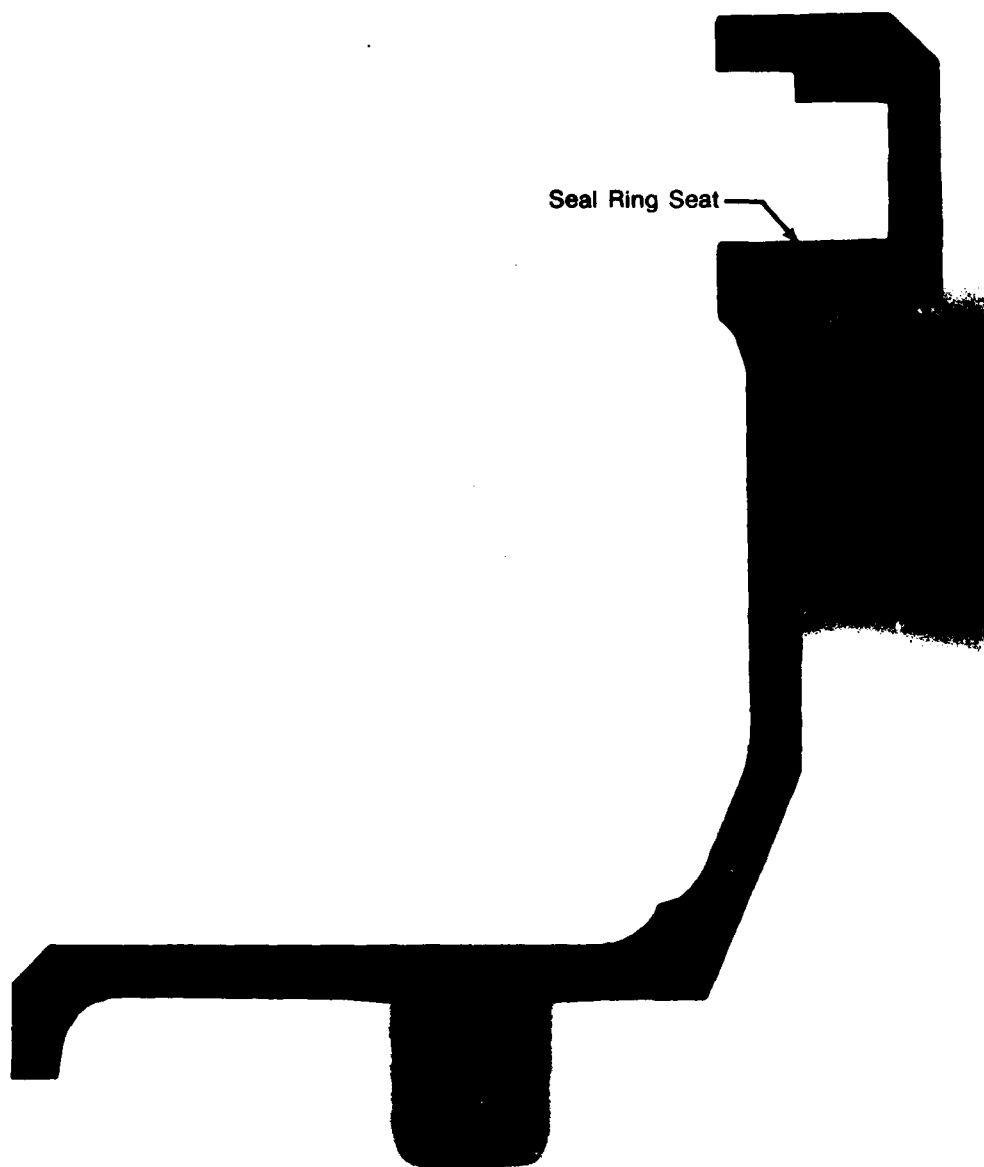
Notched Ti 8Al-1Mo-1V Augmentor Nozzle Bearing, Disassembled
